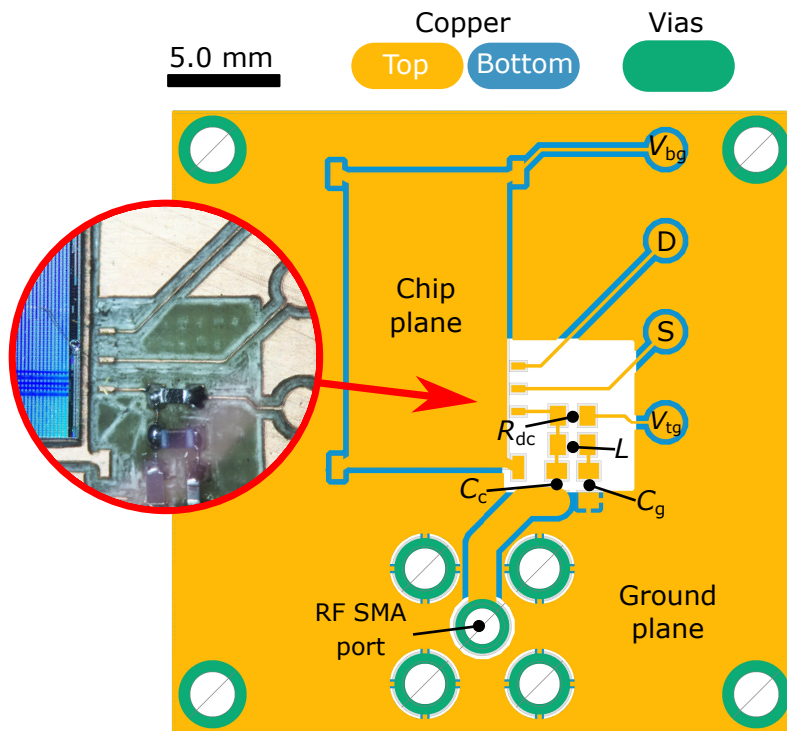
The design of the PCB used for mounting the FET chip into the cryostats. The insert shows a photo of the physical PCB, with the wire-bonded Si chip, and soldered surface mount components that make up the tank circuit used for the RF reflectometry measurements. The PCB design includes 0402 imperial code package spaces for the surface mount components; the top gate resistor R_{dc} , the inductor L , the coupling capacitor C_c and the grounding capacitor C_g . The inductor L package space can also be used to house a small spiral inductor chip, which is wire-bonded to the appropriate pads. V_{bg} shows the pogo-pin landing pad connection for the chip plane voltage, which is connected to the chip back gate via conducting silver paint. 'S' and 'D' represent the connections for the source and drain lines respectively. V_{tg} shows the DC connection for the top gate line, and the RF SMA port provides the top gate AC connection. The copper ground plane covers both the top and bottom surfaces, but the area around the top gate connection is removed from both sides to reduce the parasitic capacitance.
